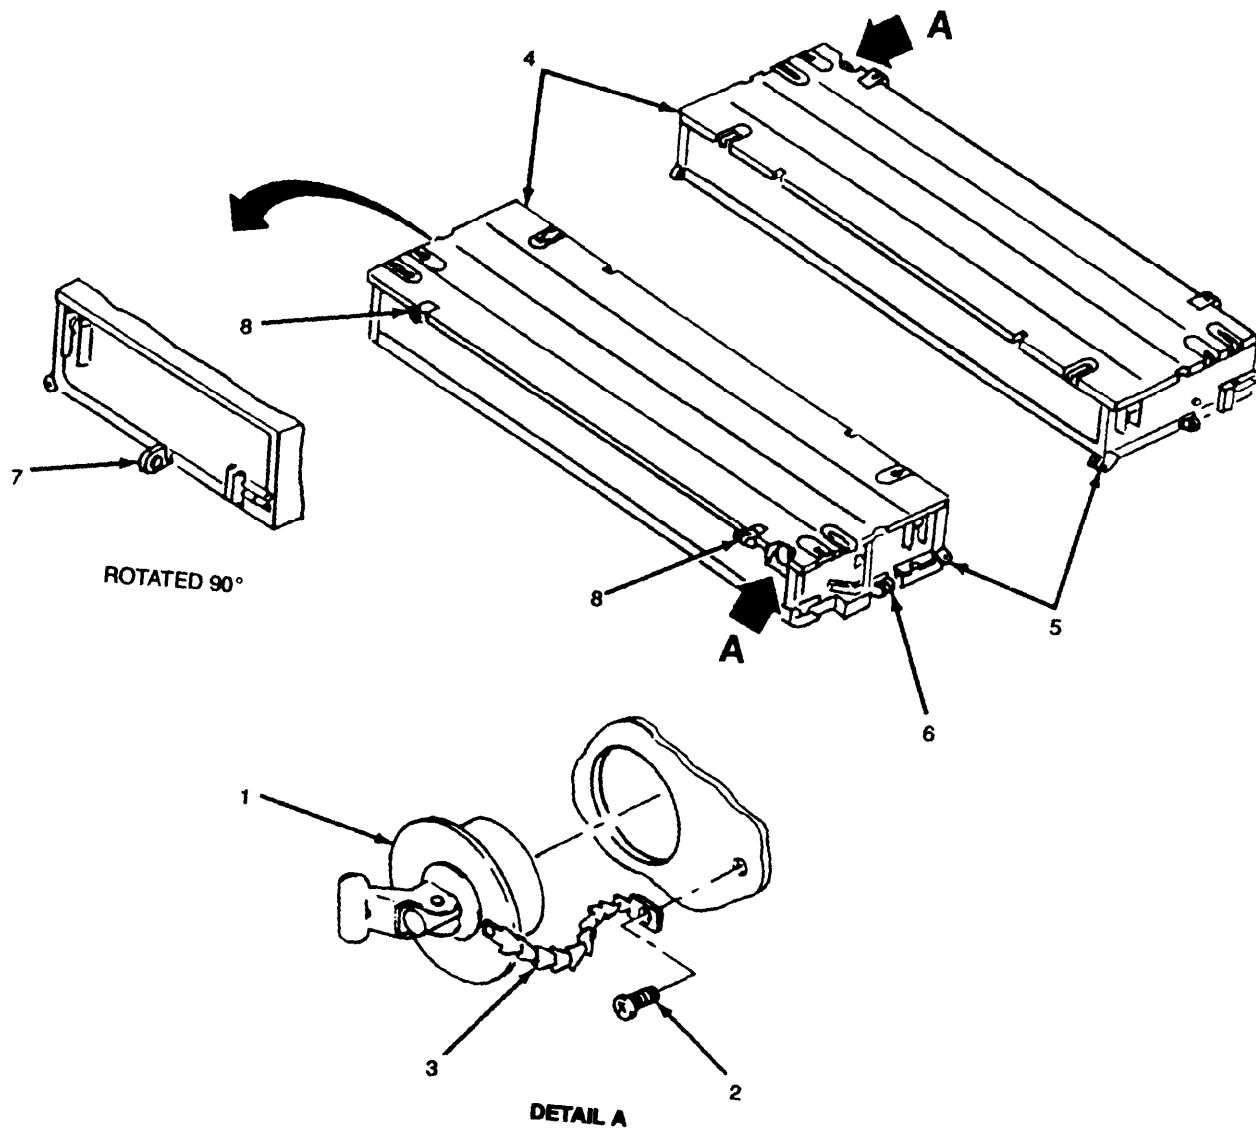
Interior Bay Roadway Pontoon, Repair
